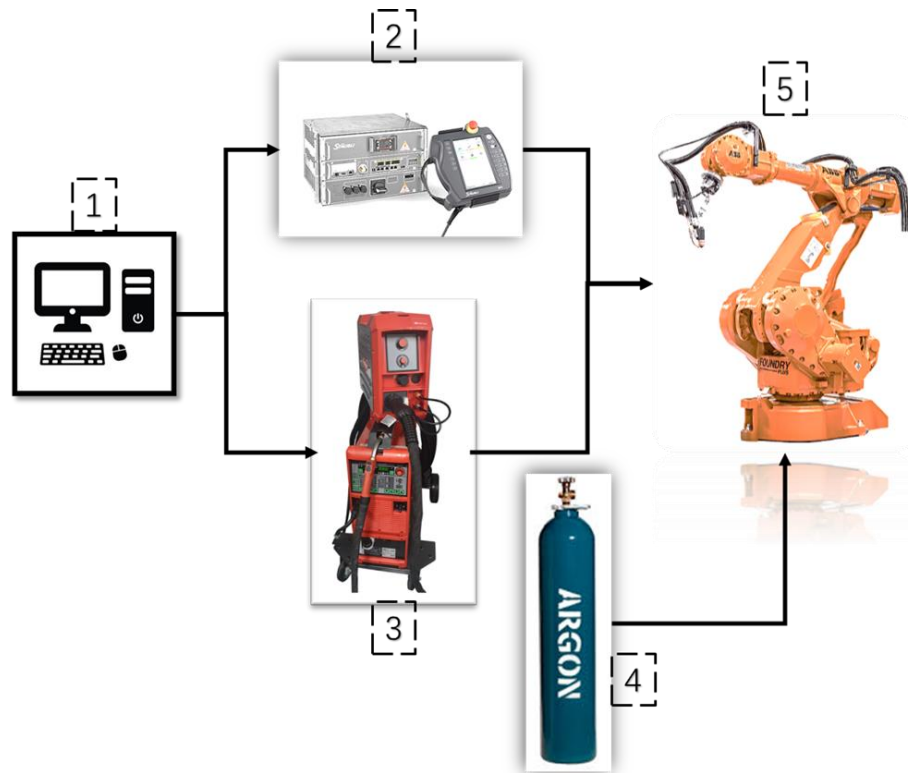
Illustration of GMAW welding system in this study.
